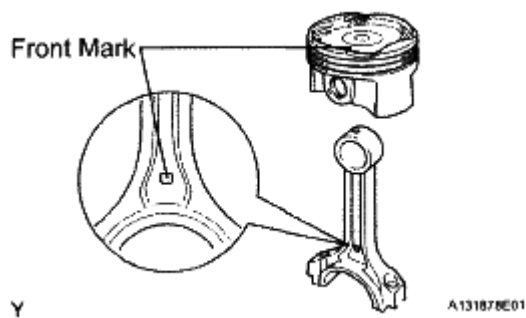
Aligning Front Marks Of Piston And Connecting Rod
